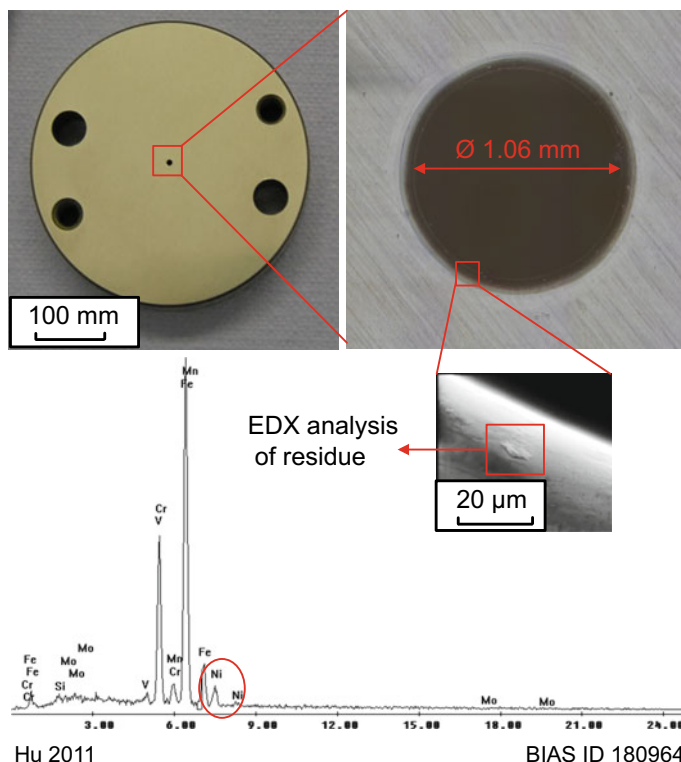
EDX analysis of a residue on the draw radius of the die
